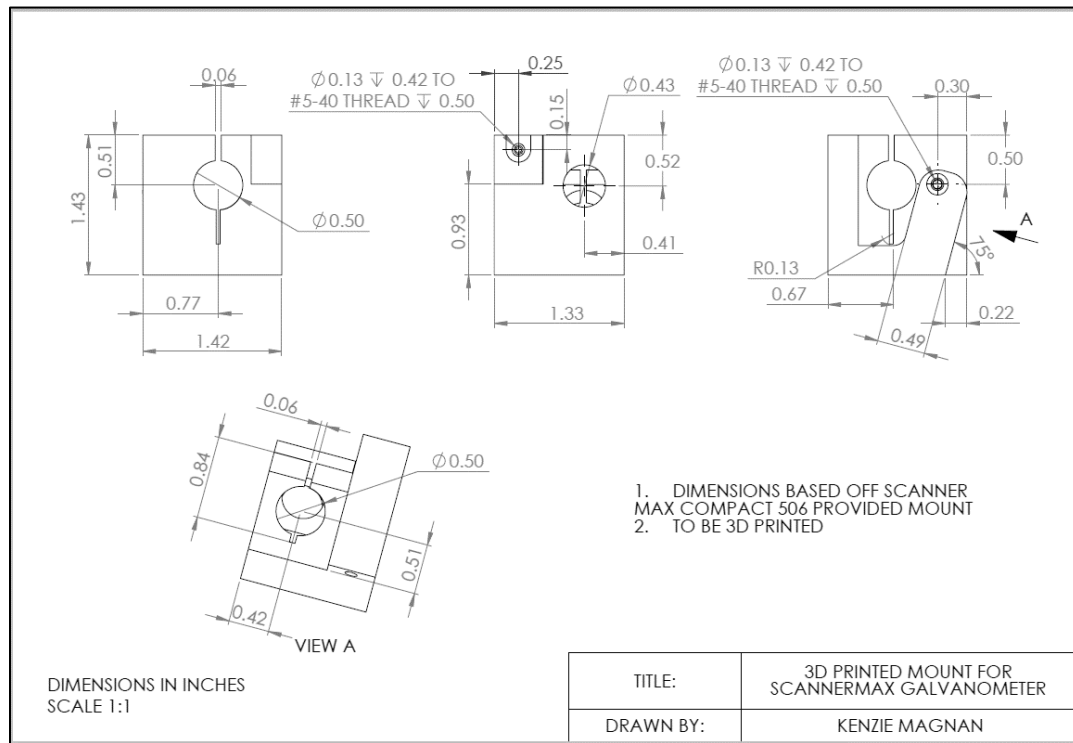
Technical Drawing of the Designed Galvanometer Mount
